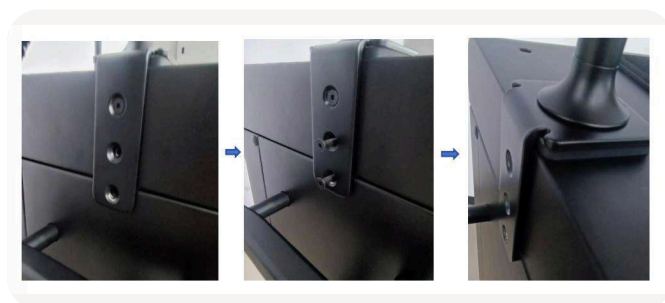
Bracket assembly: locate the plate, fit and tighten both screws, then seat the arm collar.
